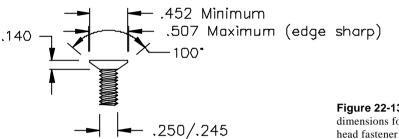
Flat head fastener dimensions for a .250-28-UNC 2B flat head fastener
